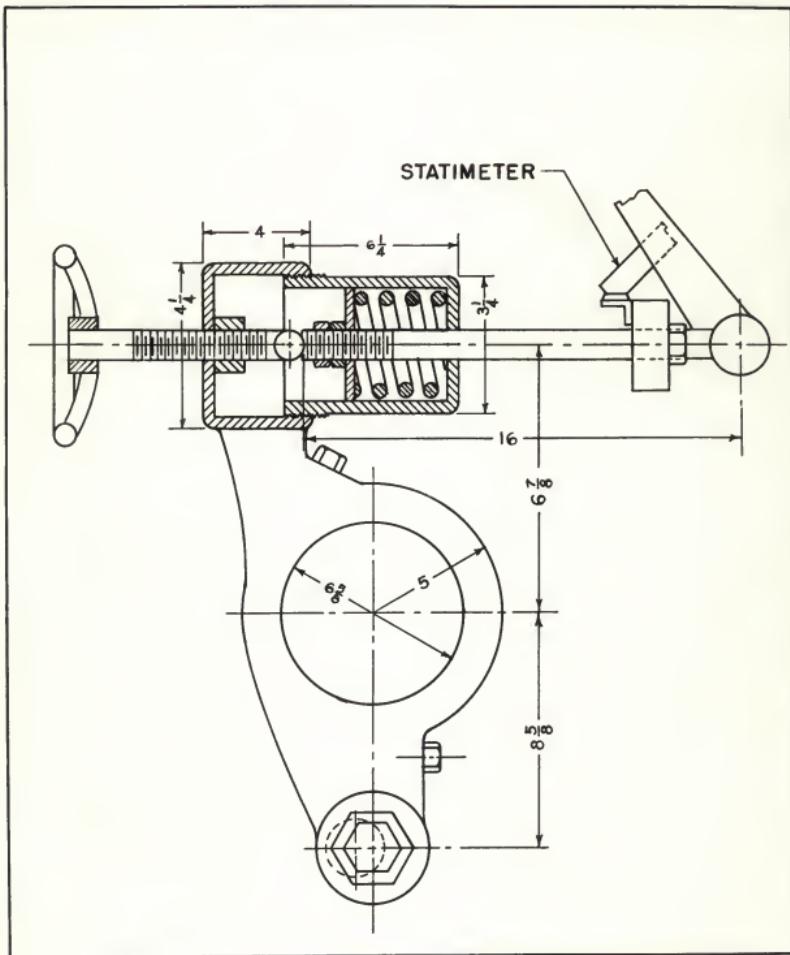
FIG. I. WOLF ROLLER MILL ADJUSTMENT.
